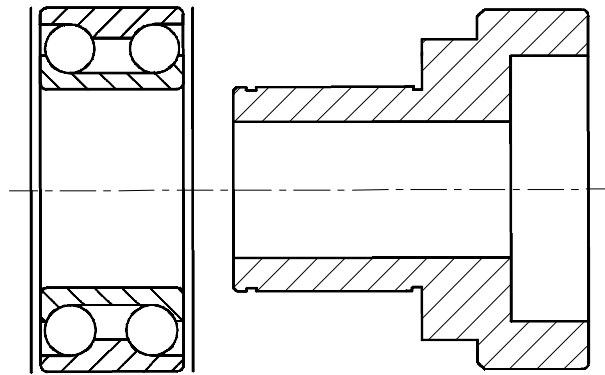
After loading the drawing SHAFT, BEARING is automatically updated
